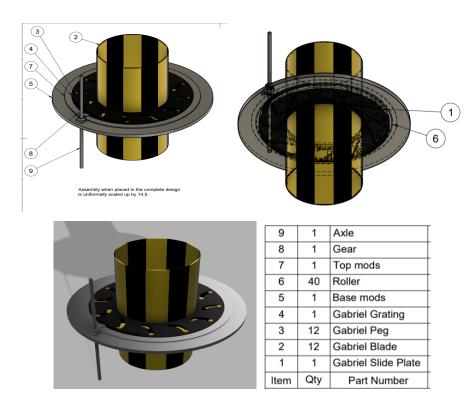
(top left): Compression unit assembly sketch. Figure 19 (top right): Compression unit assembly sketch view 2. Figure 20 (bottom left): Compression unit assembly. Figure 21 (bottom right): compression unit assembly parts list
